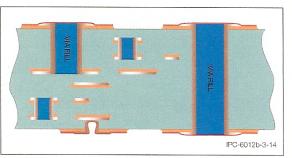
Wrap Copper in Type 4 PCB (Acceptable)
